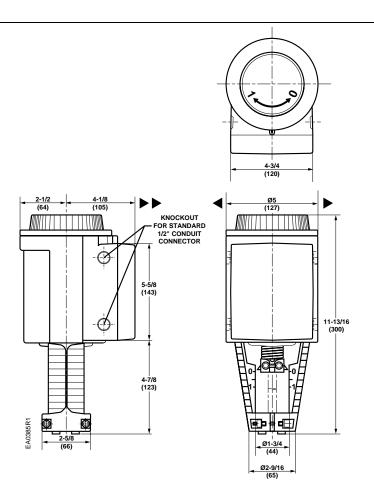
Dimensions of SKD Actuator in Inches (Millimeters).
